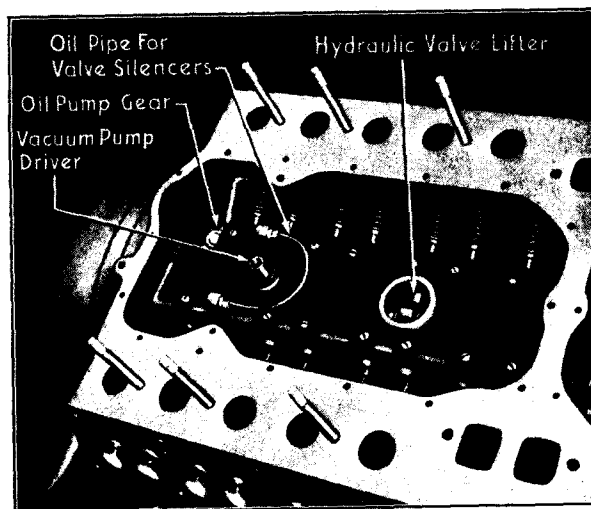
Hydraulic valve lifters are used in the 38-90 engine
